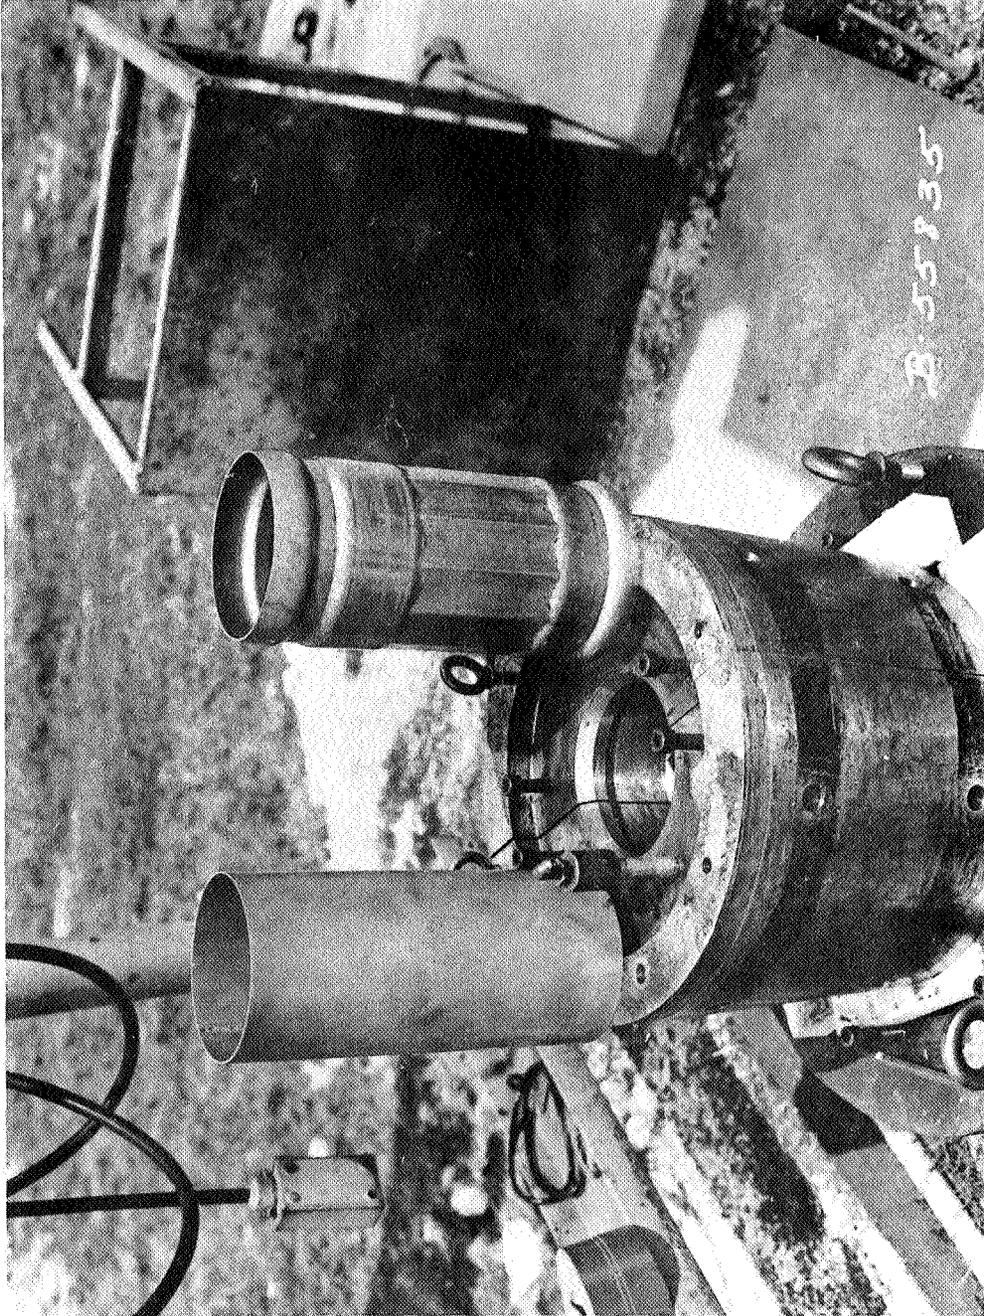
TYPE 316 STAINLESS STEEL WELDED TUBE EXPLOSION DEVICE FORMED INTO 12 SIDED TUBE
